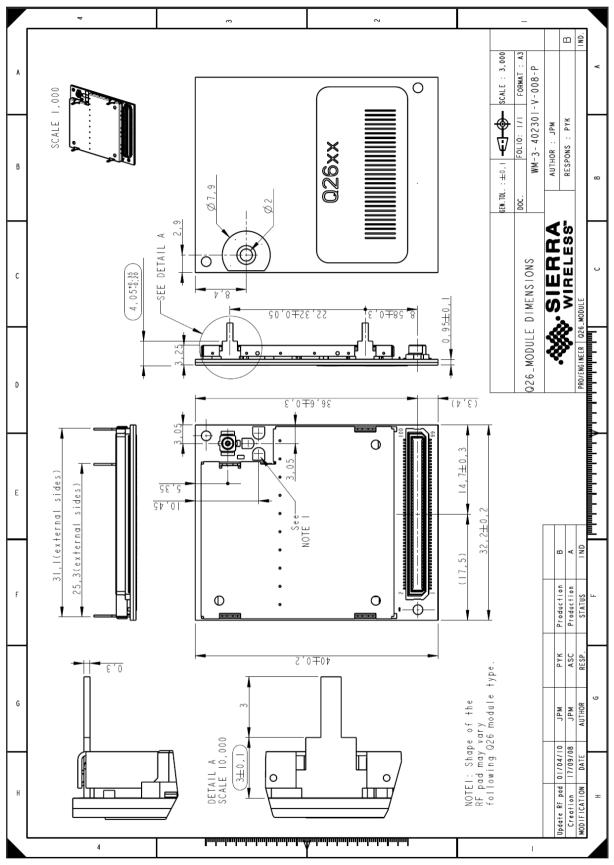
Q2687 Refreshed Embedded Module Mechanical Drawing
